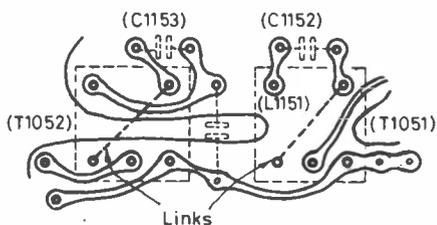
P.C layout and component layout (New style) (T1052) and (T1051) Premix Osc Filter showing links.
